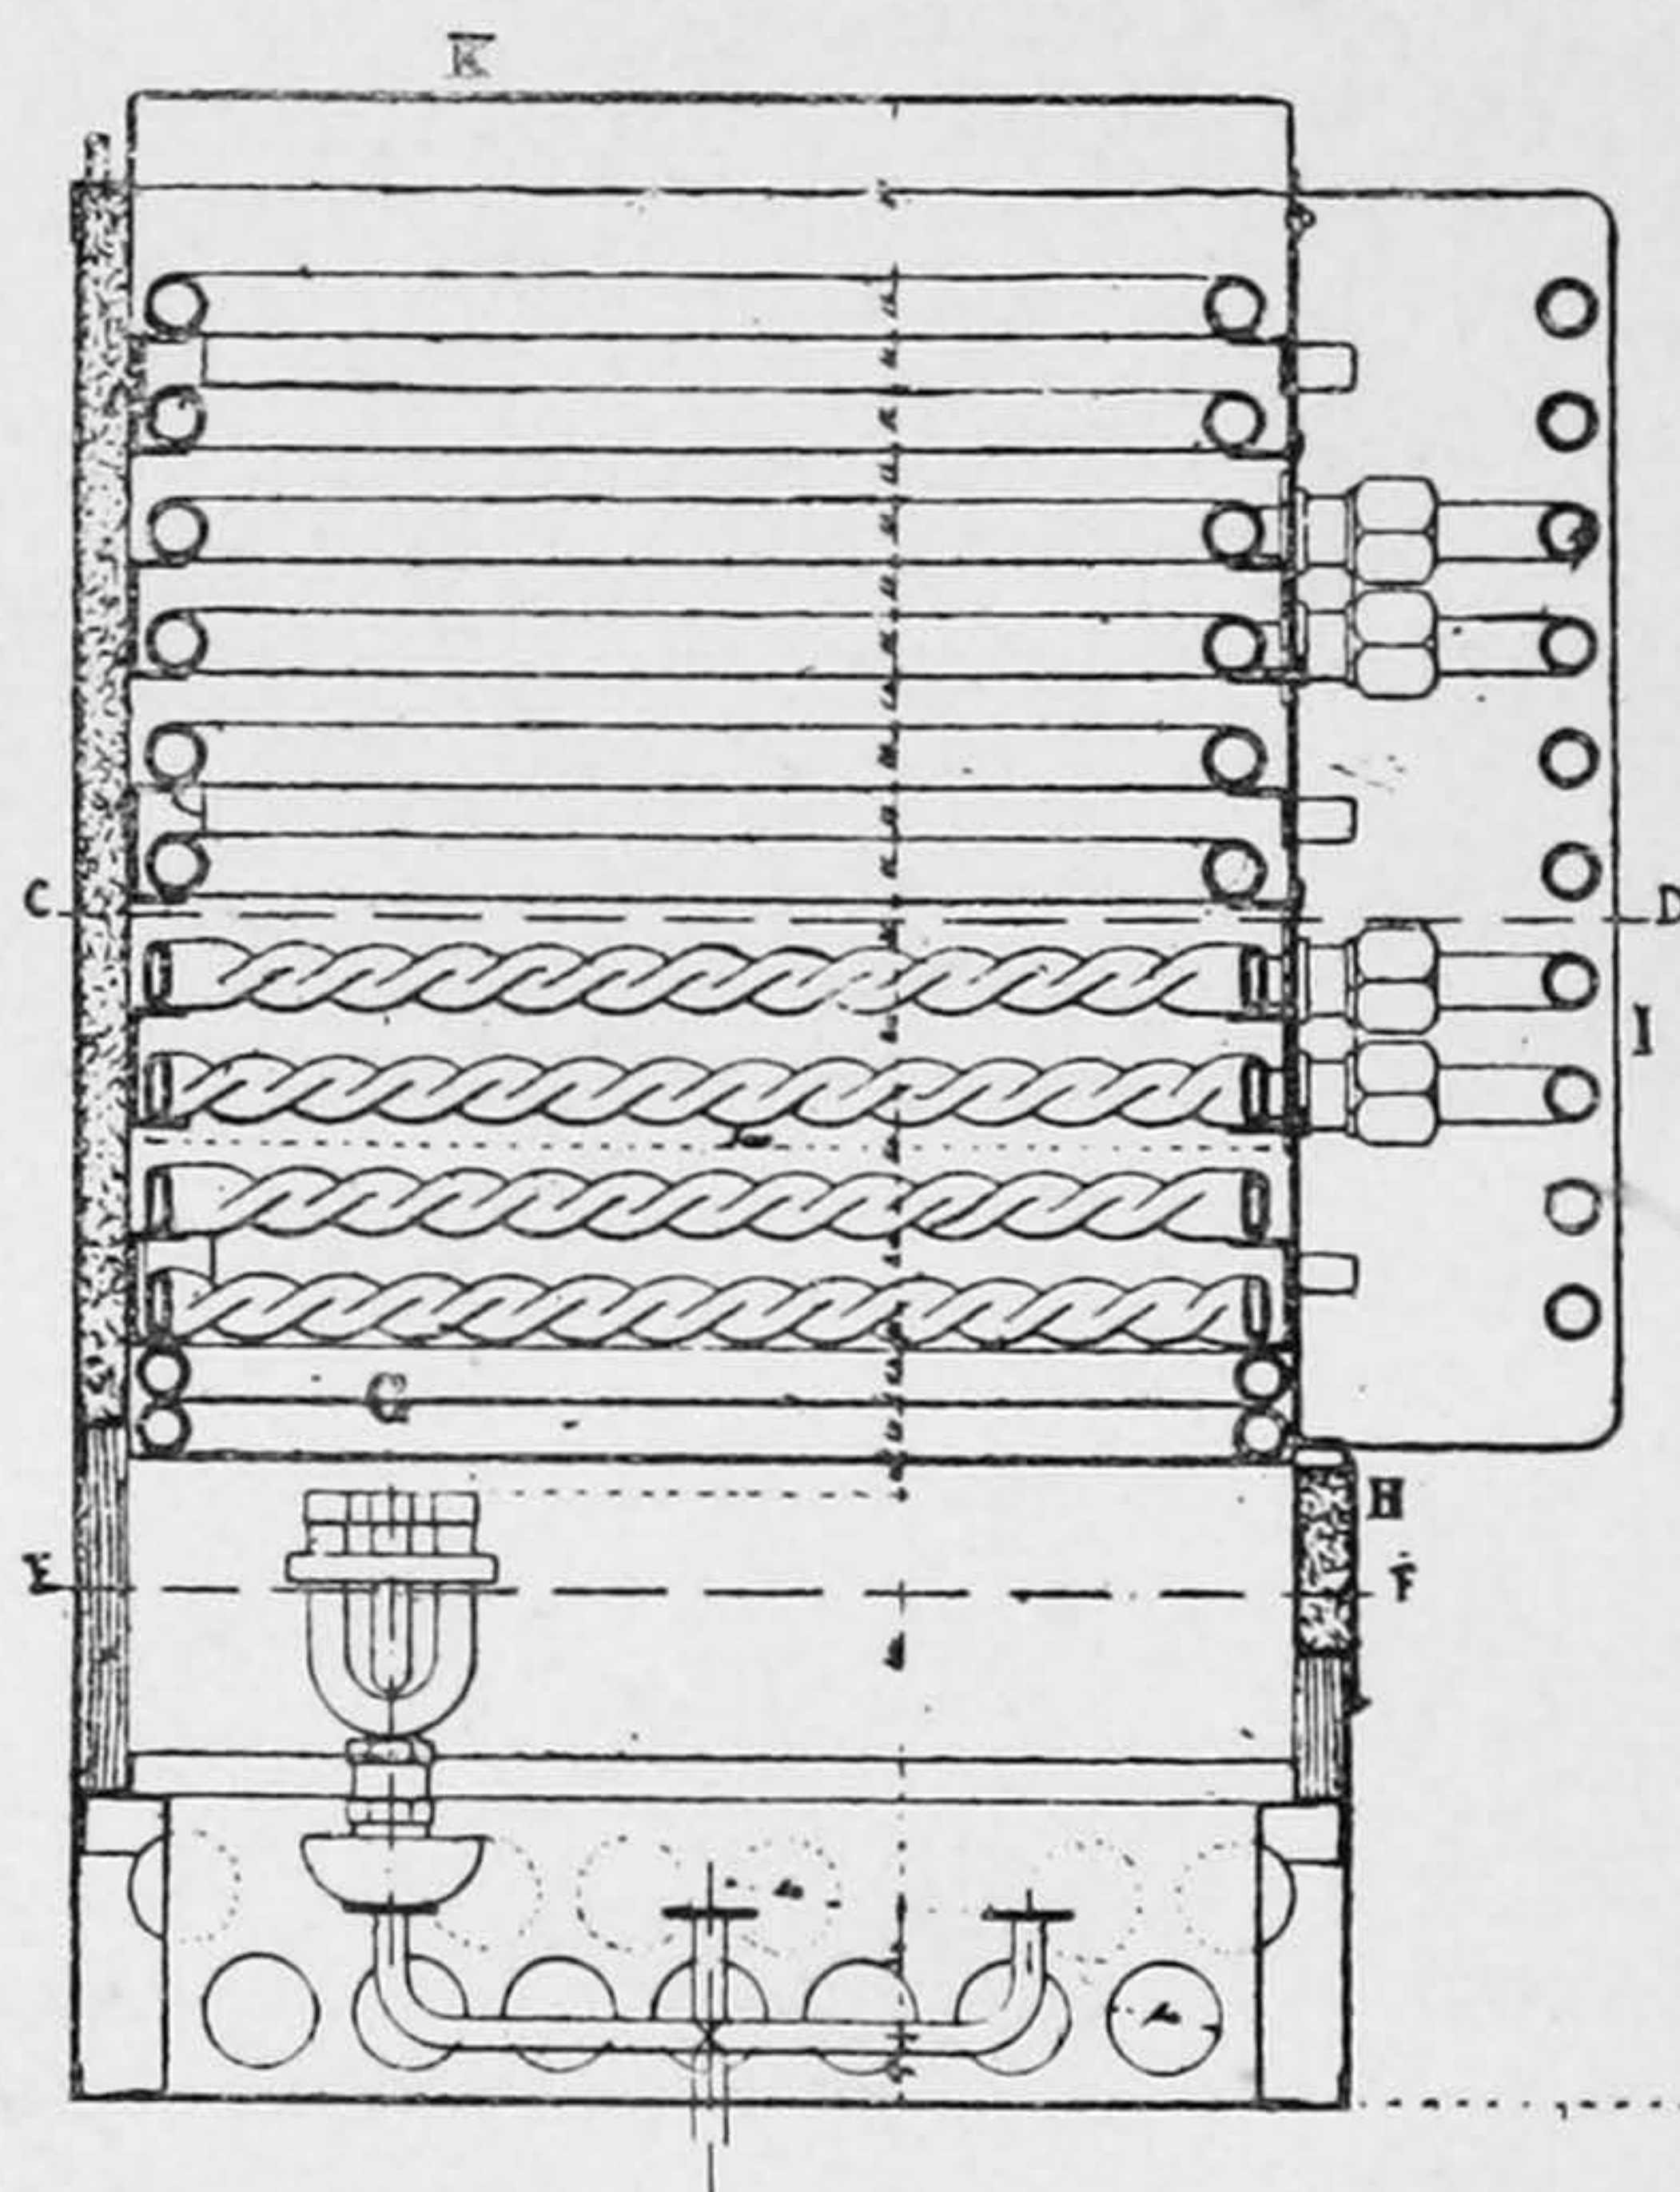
HALF-ELEVATION OF BOILER USED IN "SERPOLLET" CAR.
